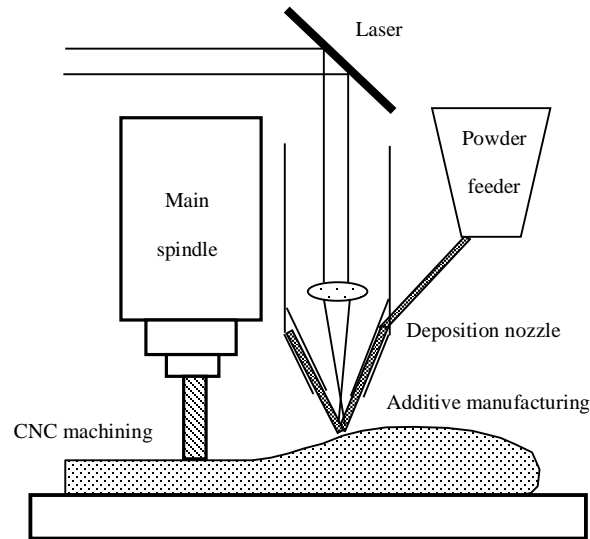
A hybrid manufacturing system: Additive manufacturing and CNC machining
